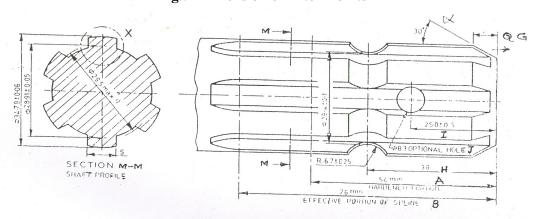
Dimensions of Rotavator Power Input Shaft, mm
